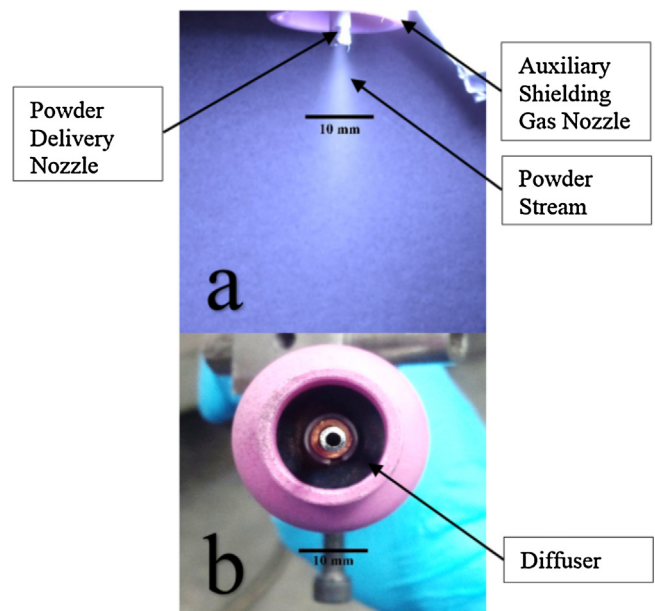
Nozzle discharge; a: side view; b: bottom view.
